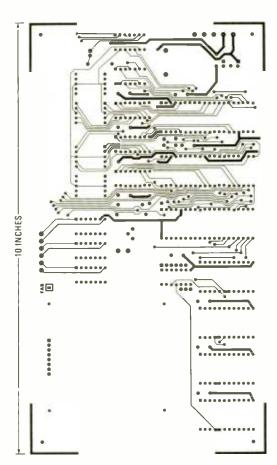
THE REAR SURFACE of the board has this foil pattern. These patterns are shown slightly smaller than half-size.
